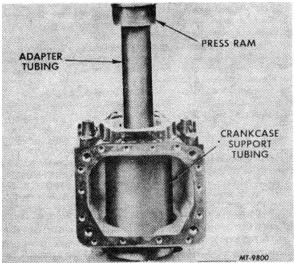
Removing Crankshaft Front Bearing from Crankcase
